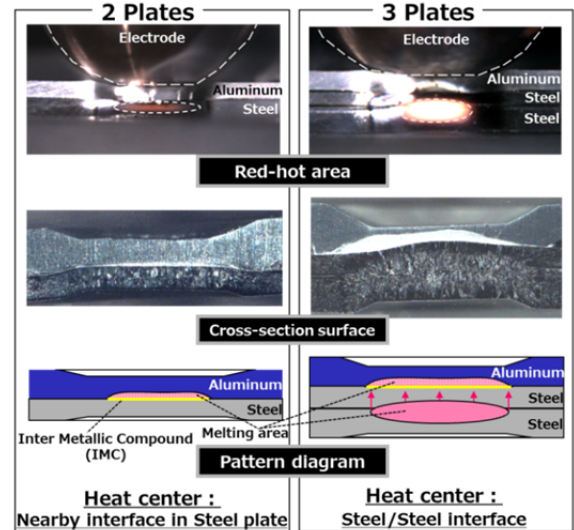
Schematic View of Steel/Aluminum Resistance Spot Welding Process
